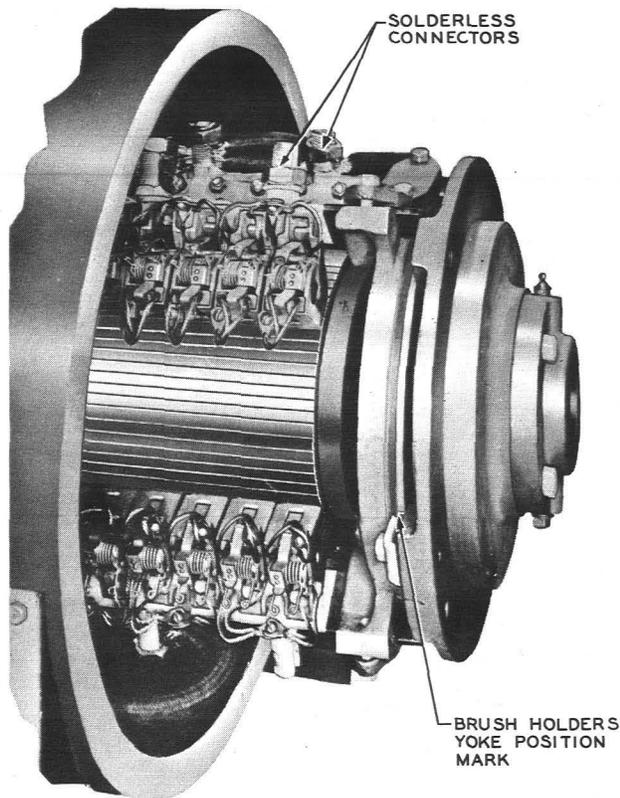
Brush Rigging, Yoke, and Bearing Housing - KS-5123-04 Type Shown
